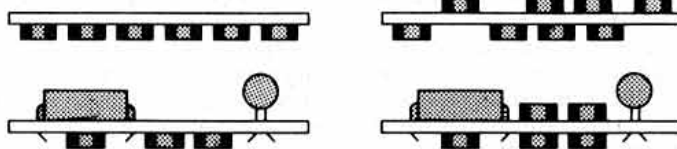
Surface-mounted components can be mounted on or below the printed circuit boards.
